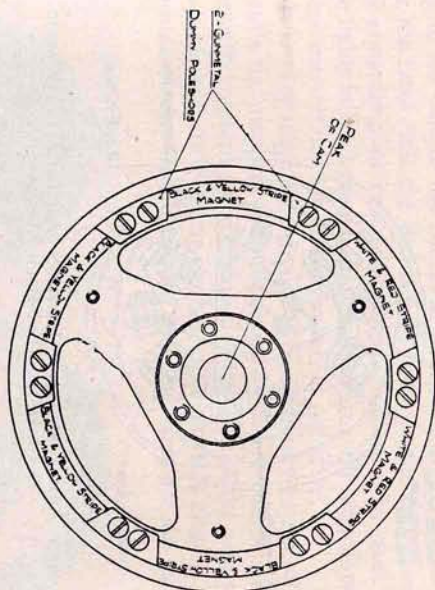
FLYWHEEL ASSEMBLY OF SIX-POLE 18-WATT MAGNETO.
